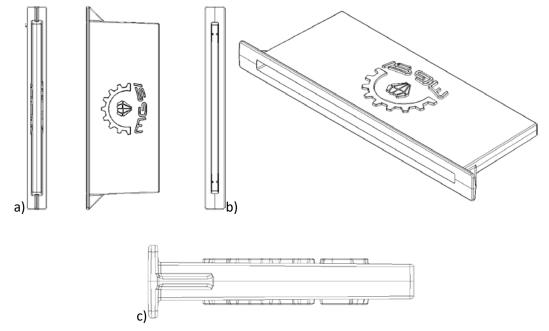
Dowel sleeve: a) front, back and top plan view; b) iso view; c) side view
